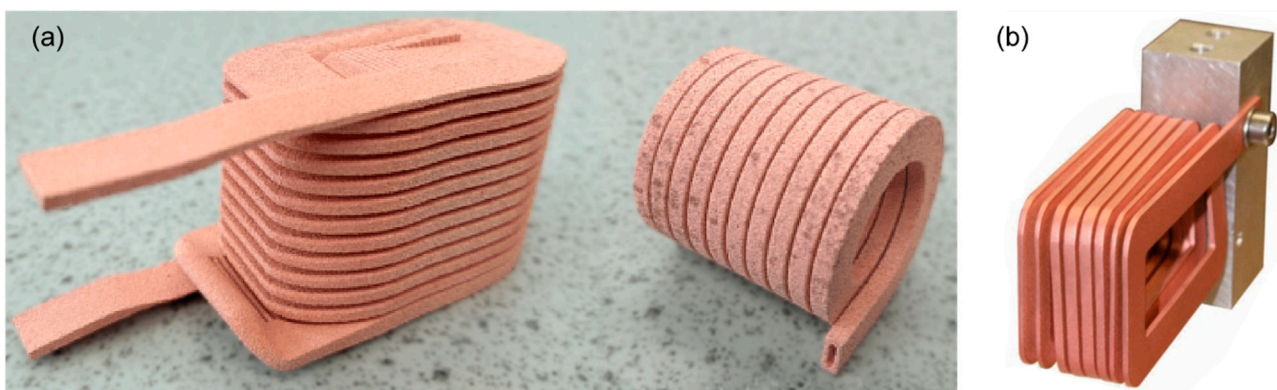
3D-printed hairpin windings for electric motors (a), reprinted from Ref. [67]; 3D-printed hairpin head mounted on conventional stator windings (b), reprinted from Ref. [68].
